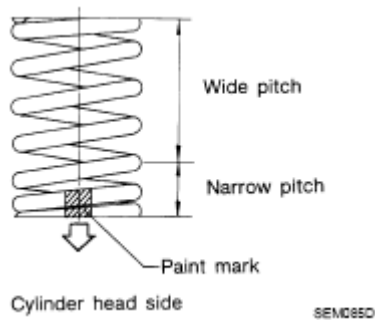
Identifying Narrow Pitch End (Paint Mark) To Cylinder Head Side (Valve Spring Seat Side)
